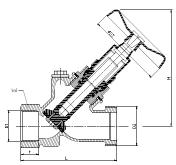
Alwa-Valve with internal thread on inlet and external thread on outlet
